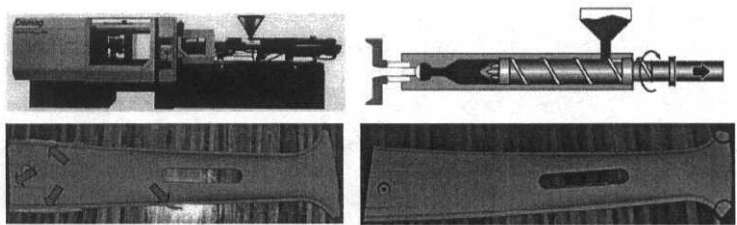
Molding Machine, Plasticizing Process and Plastic parts defects.
